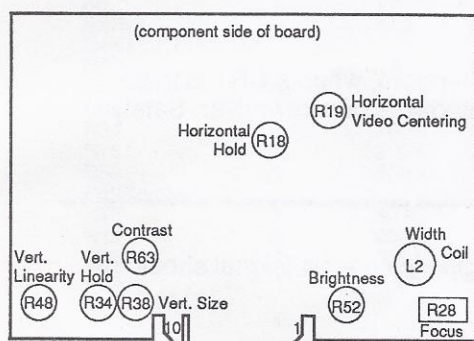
Monitor circuit card edge connector--component side view and adjustments.
